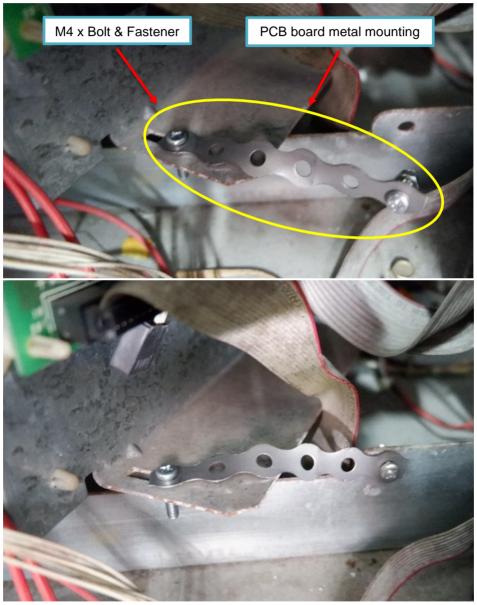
f – Tightened the screw and nuts by using Philips head screw driver and Wrench spanner, 7mm.
